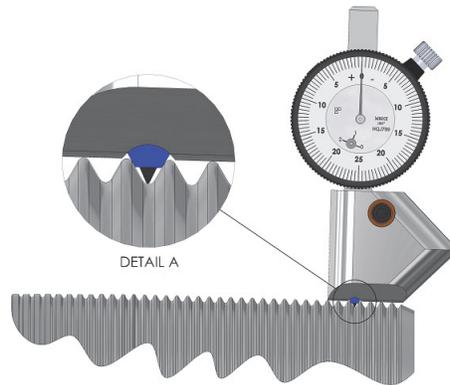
External Thread Height Gauge on Pin Threads (Round Thread Height Gauge)
